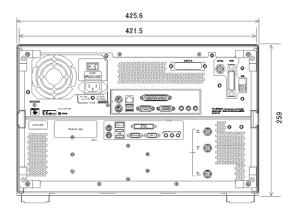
Dimensions (rear view, in millimeters, nominal)
